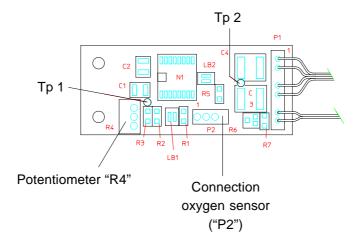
PCB "OXS", assembled, horizontal projection
